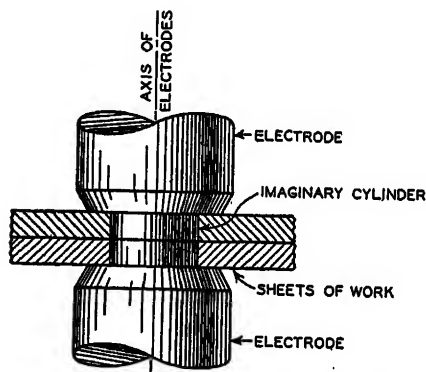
Cross section of weld region showing imaginary cylinder
